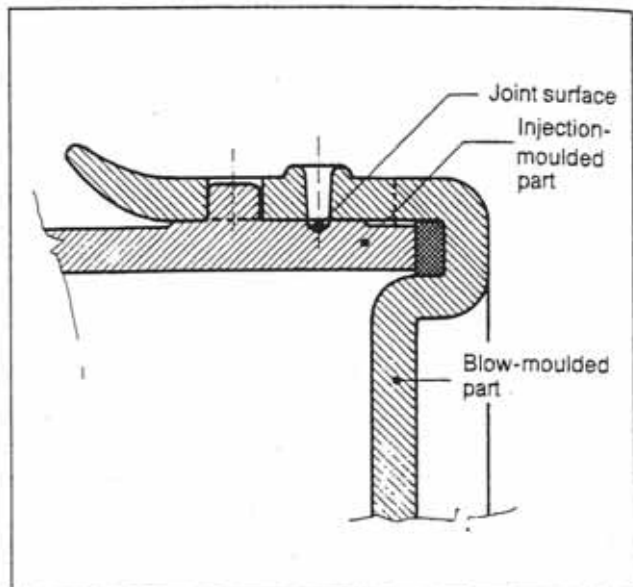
Ultrasonic spot welding of blow moulded and injection moulded parts
